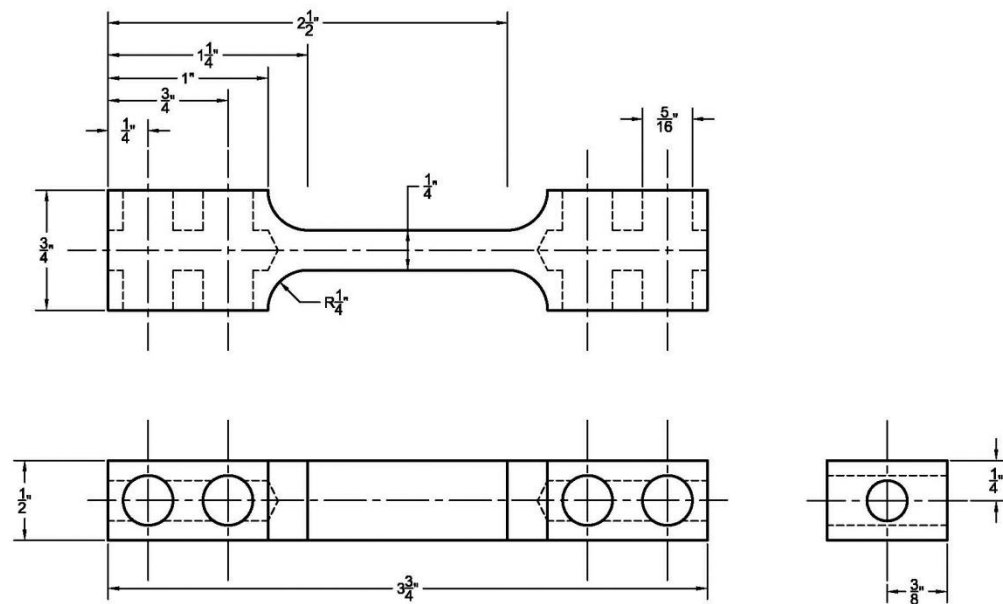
Custom Built, In-Line, Load Sensor Design
